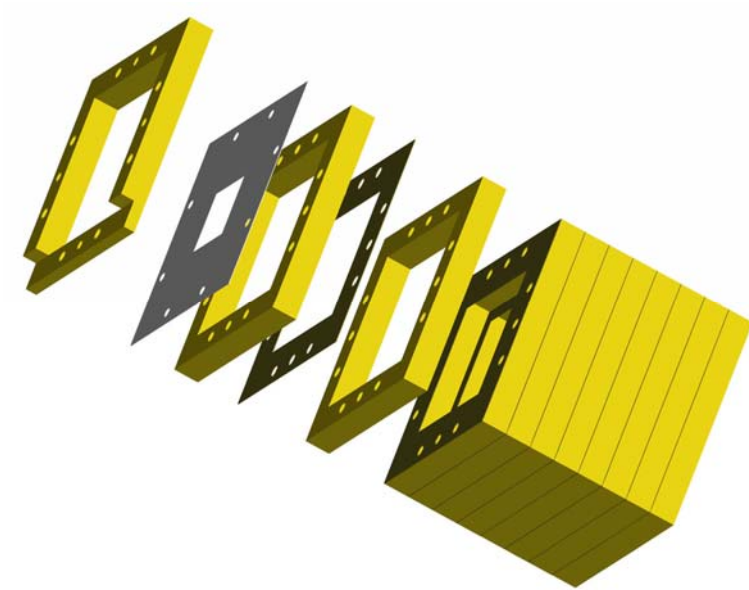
CAD drawing of inner baffle built with Pro/ENGINEER.
